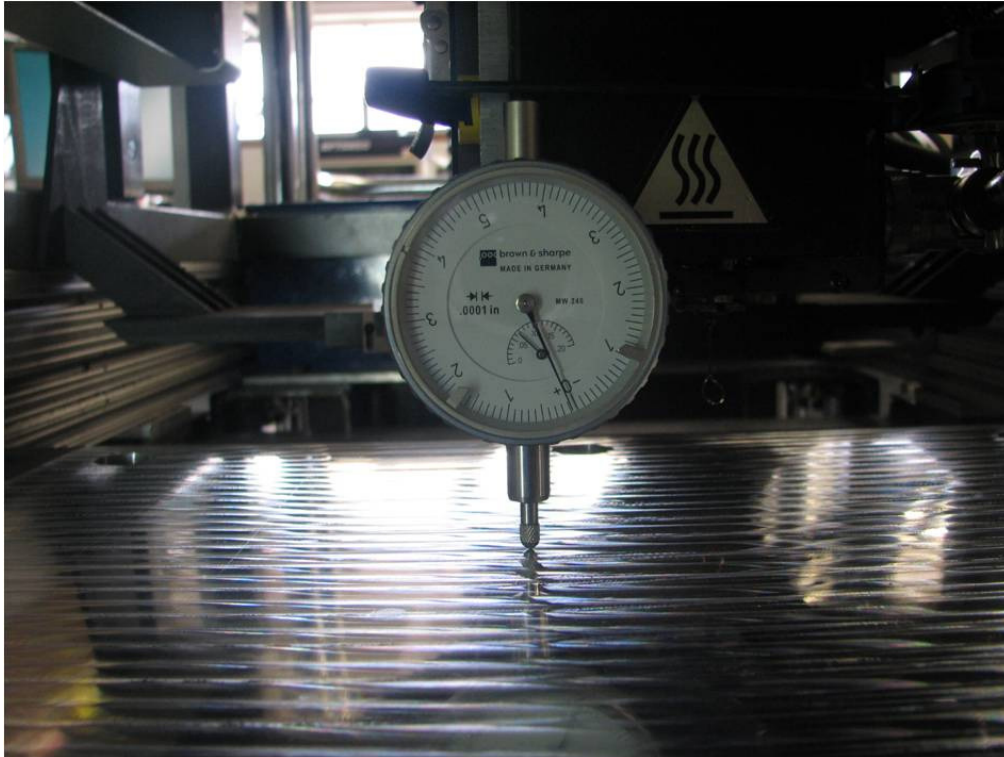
Using a dial indicator to level the FDM machine with the UC machine.
